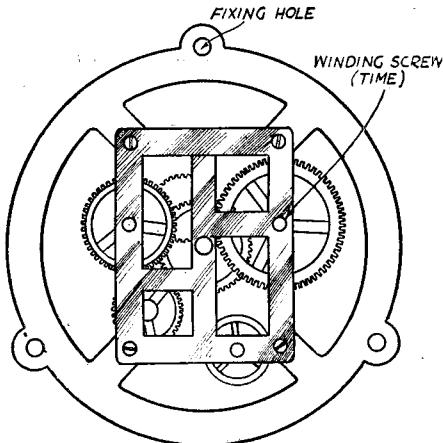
The "works" of an alarm clock which are screwed on to front of the cabinet.
